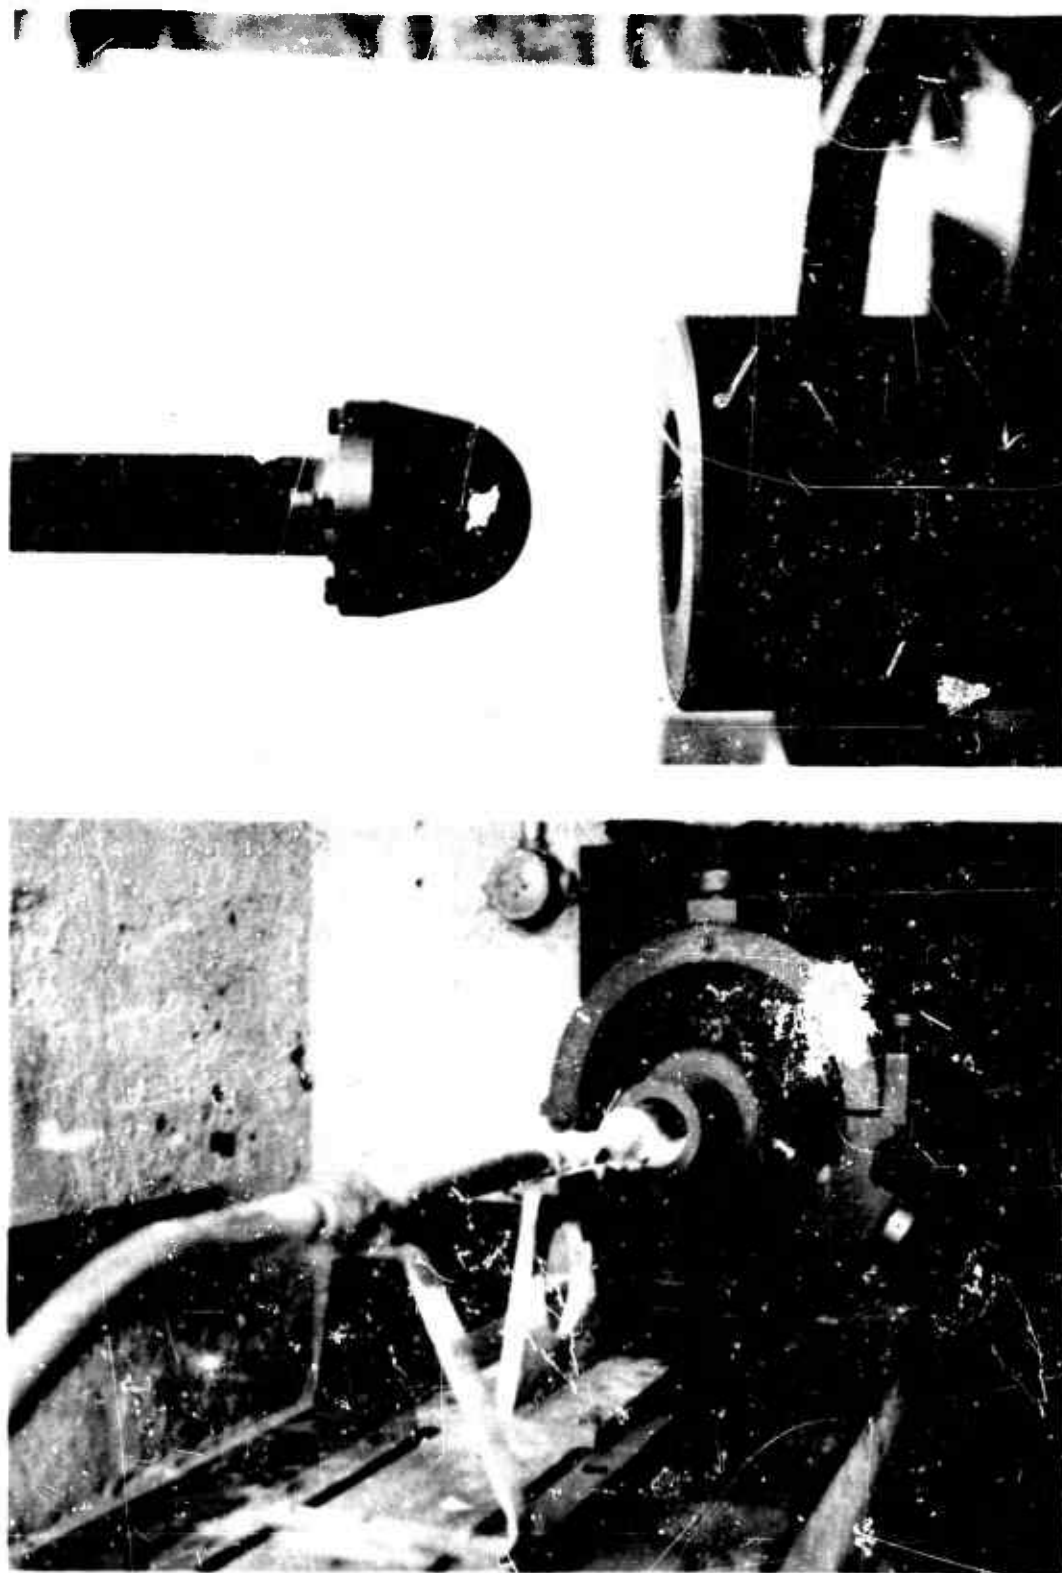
SPECIMEN HOLDER AND SUPPORT FIXTURE
